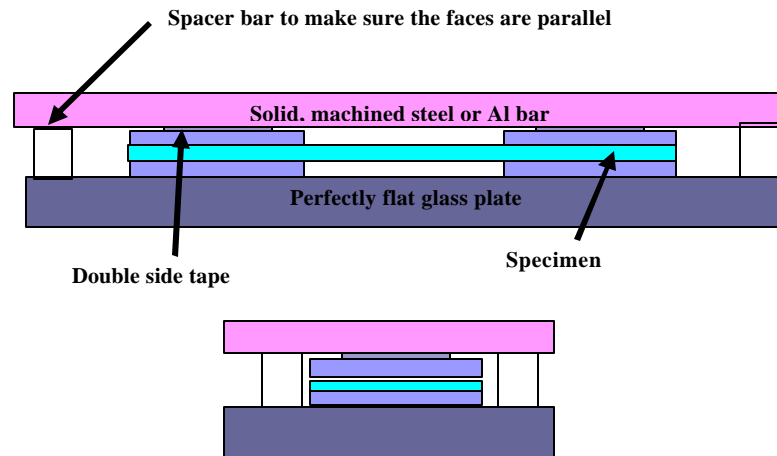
Details of the end piece connection for a perfectly flat tension specimen
